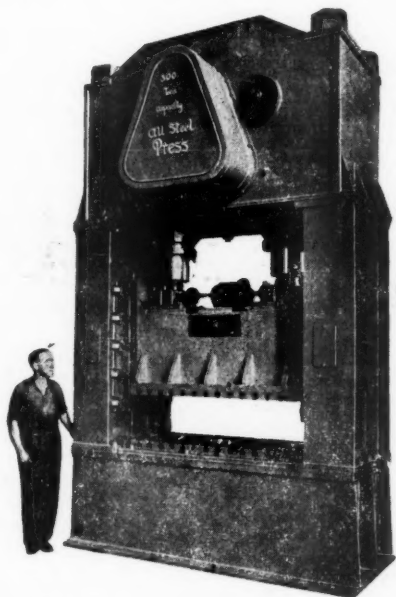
ALL-STEEL HEAVY-DUTY STAMPING PRESS
